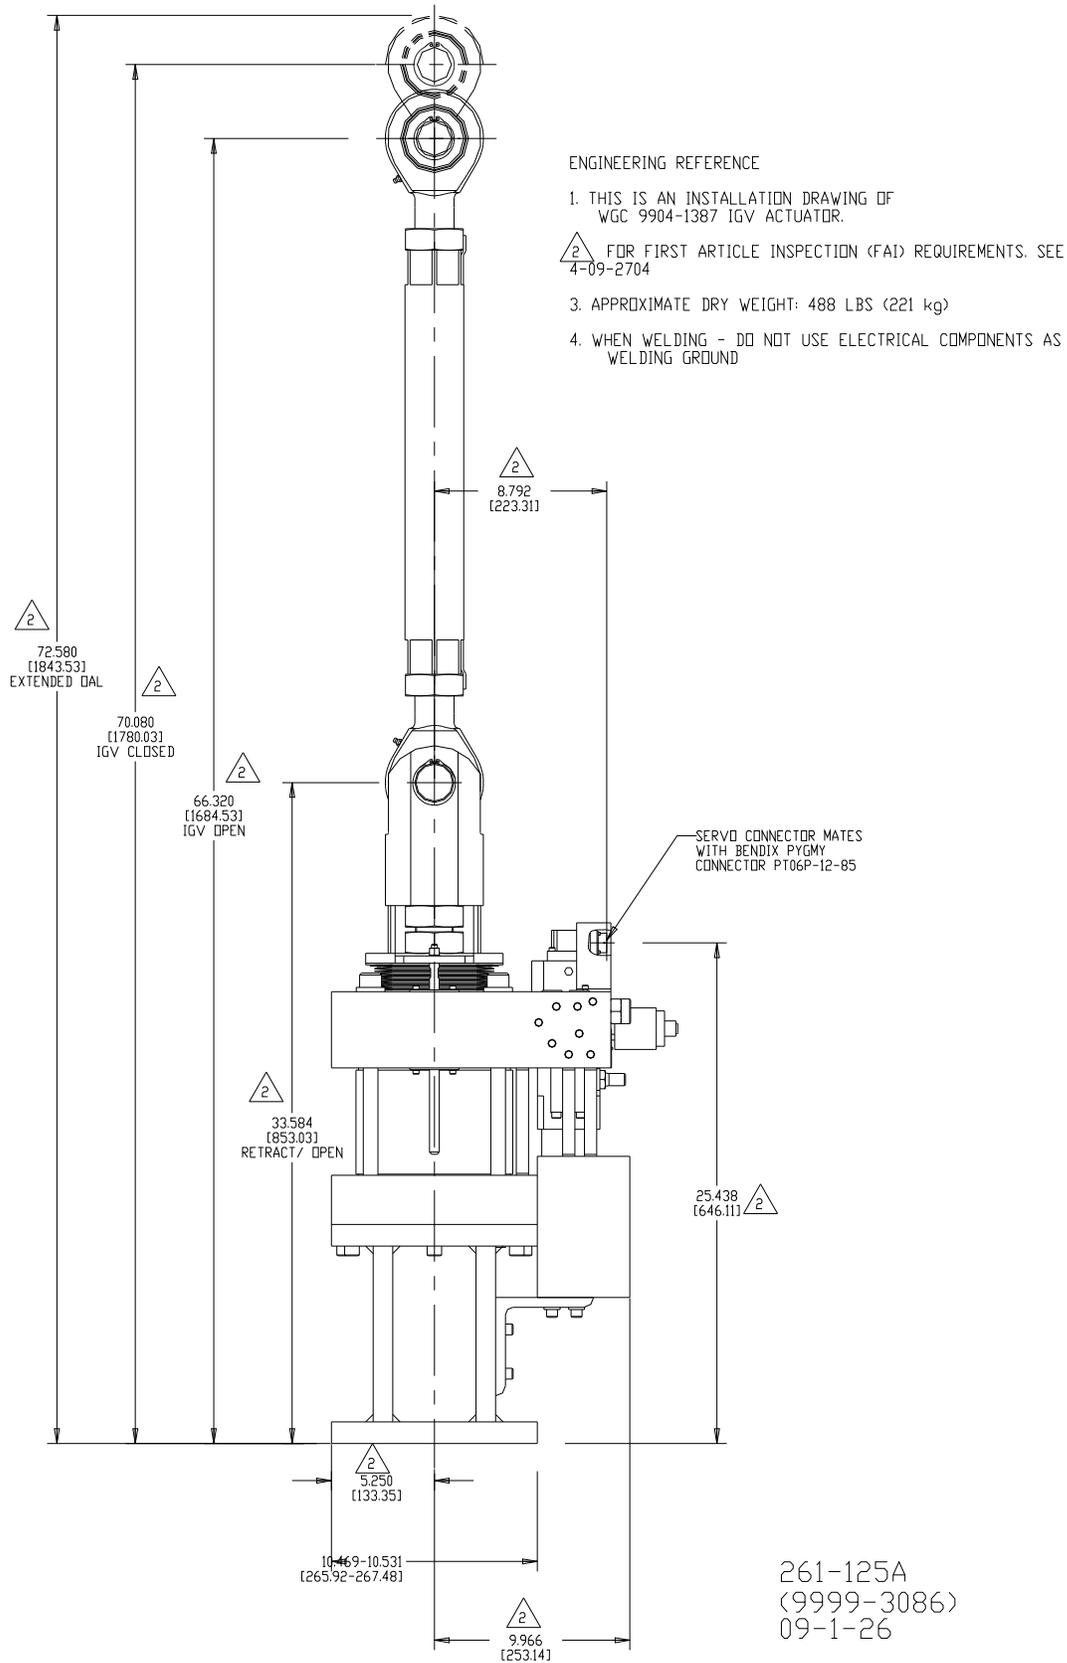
9F IGV Actuator with Electric Trip and SAE O-ring Thread Type Connection (left side view)
